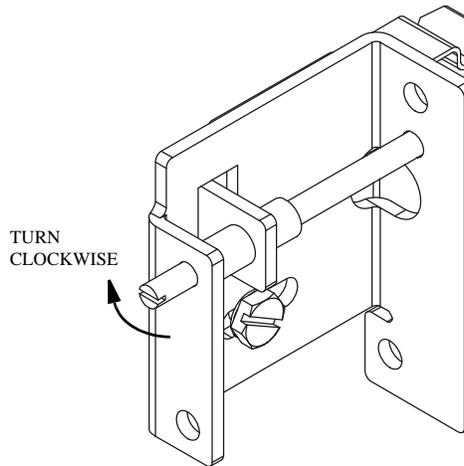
Adjustment if Holes Are Too Close to the Front.
